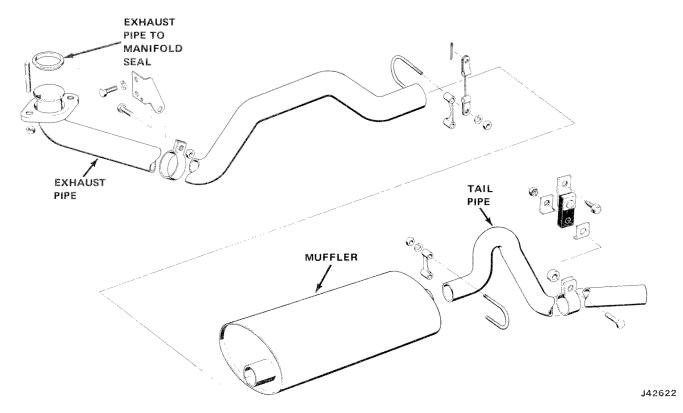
Exhaust System -CJ-5/CJ-6 Six-Cylinder Engine
